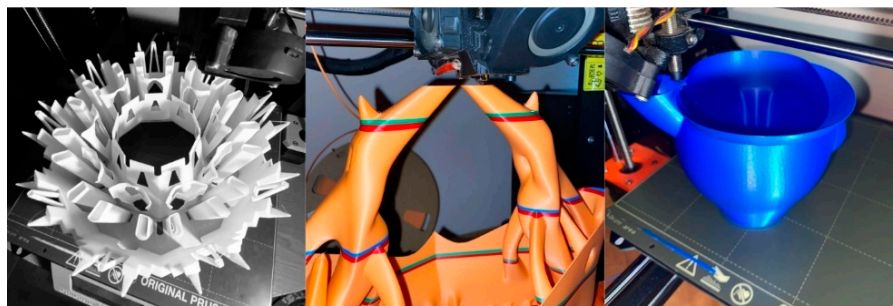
3D printable shapes which do not require supports. Designed and printed by the author of the paper.
